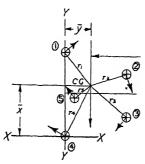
Eccentric load on bolted (or riveted) fitting.
